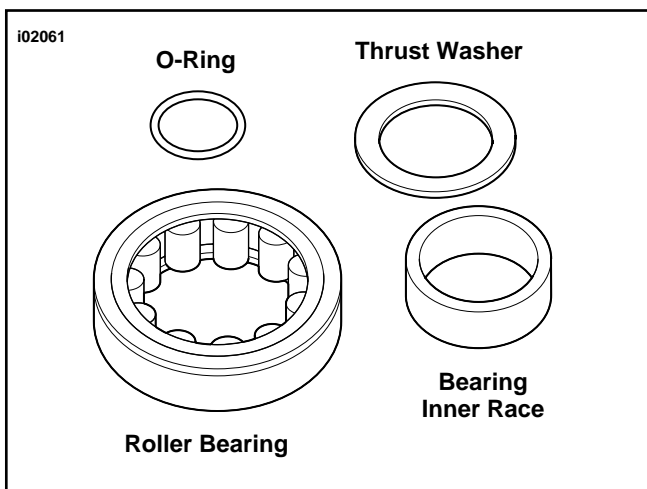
Rear Cam Roller Bearing Kit (P/N 8983)
